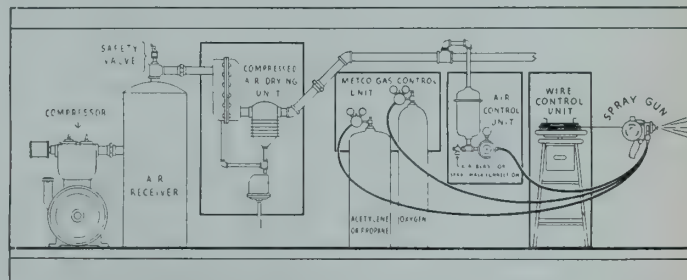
Complete equipment for metallizing work includes compressor capable of supplying 35 cu. ft. per min. at 65 lb. per sq. in. and air and gas control units. Drying unit next to compressor is needed only where air is particularly moist or oily.
